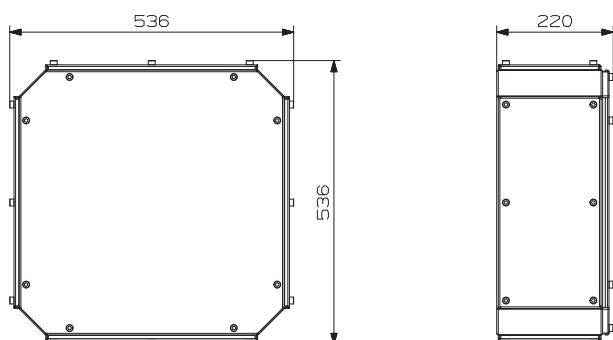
Motor sizes 250, special oversized design with 21 terminals
